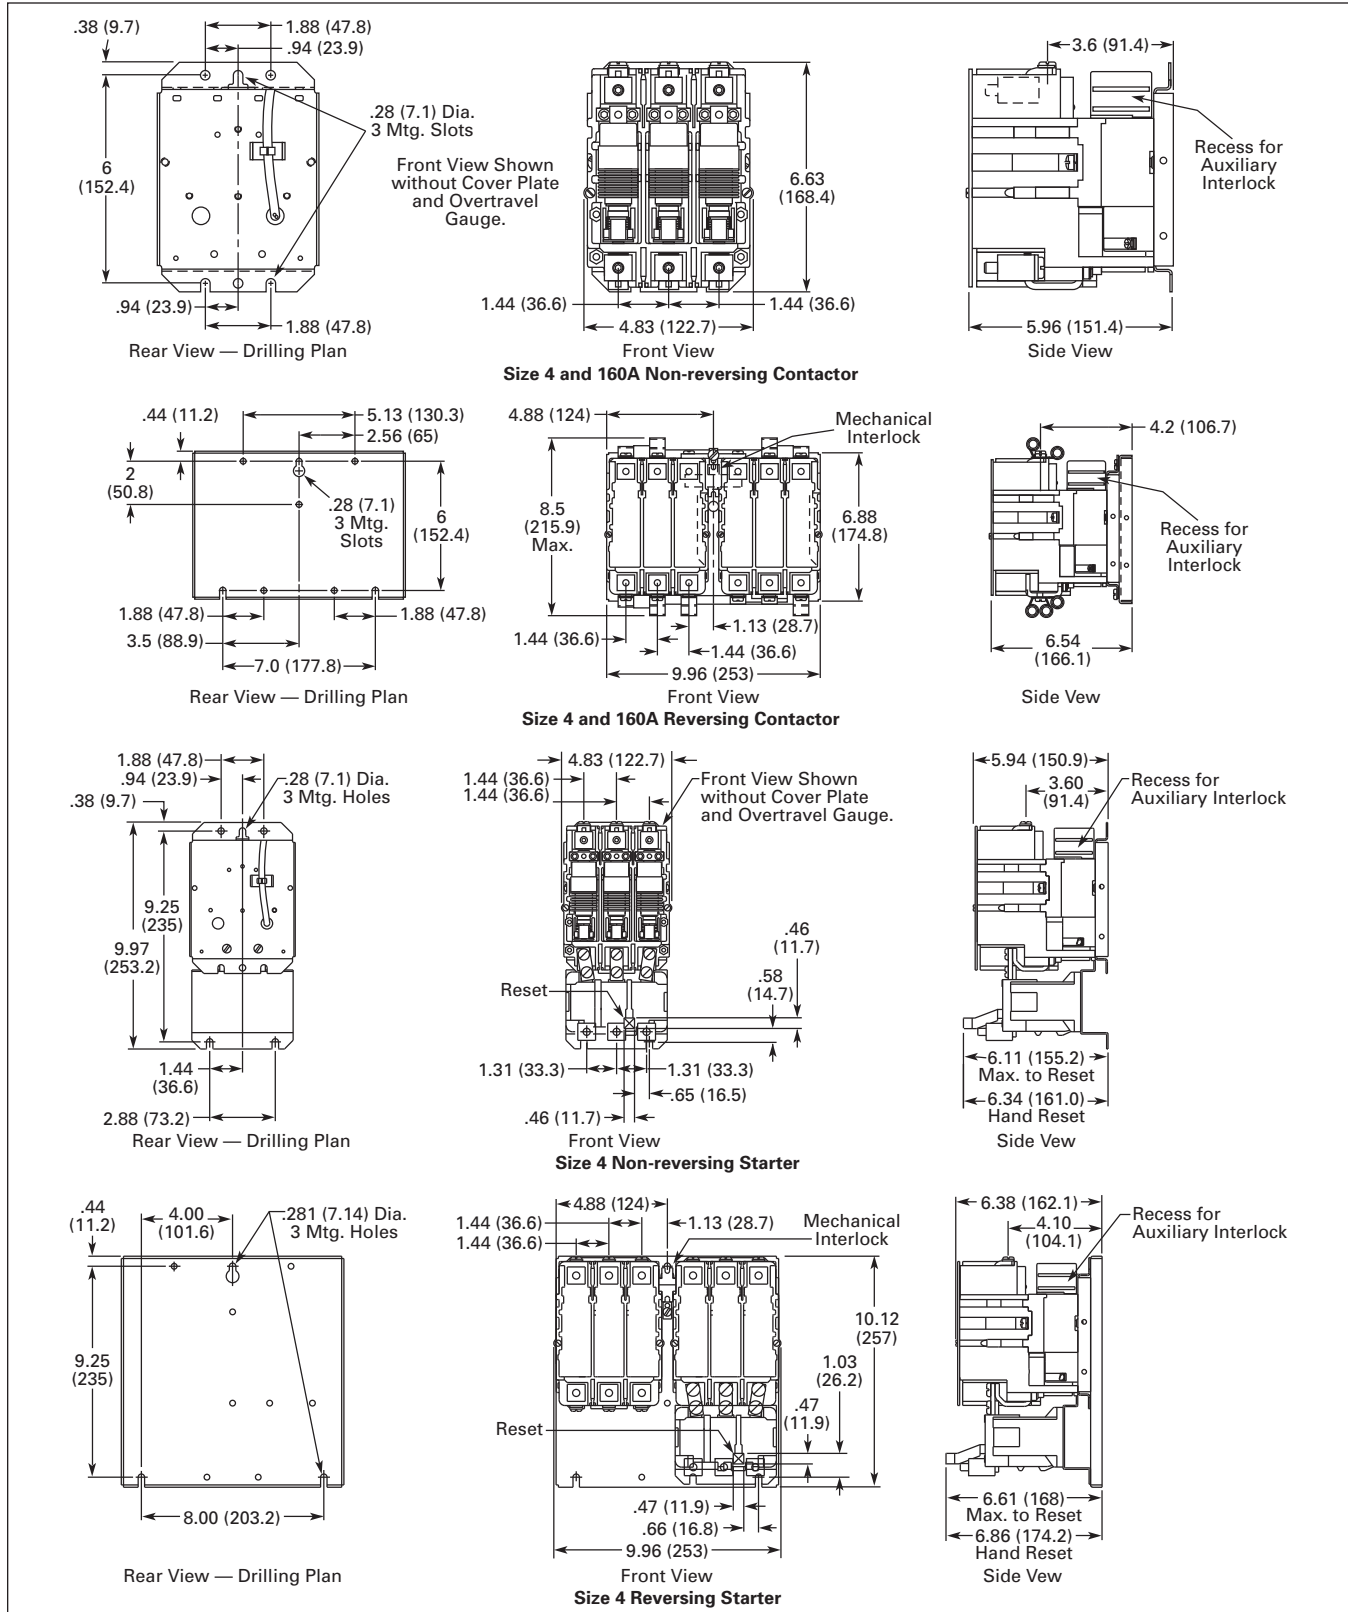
Open Type Contactors and Starters — Size 4 and 160A — Approximate Dimensions in Inches (mm)
